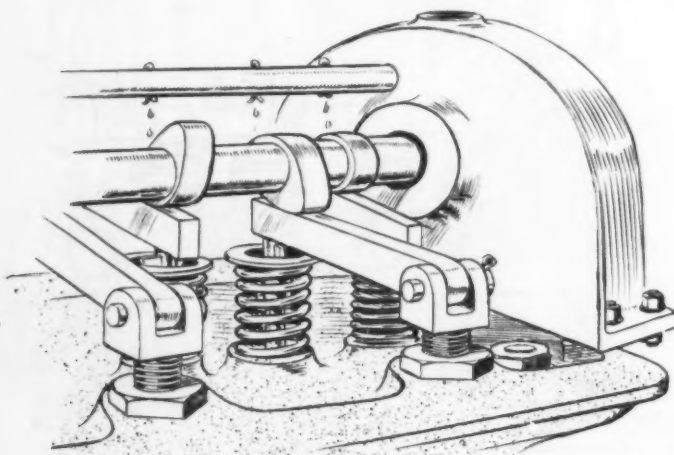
CAM MECHANISM ON THE RHODE, A BRITISH LIGHT CAR HAVING A FOUR-CYLINDER ENGINE
